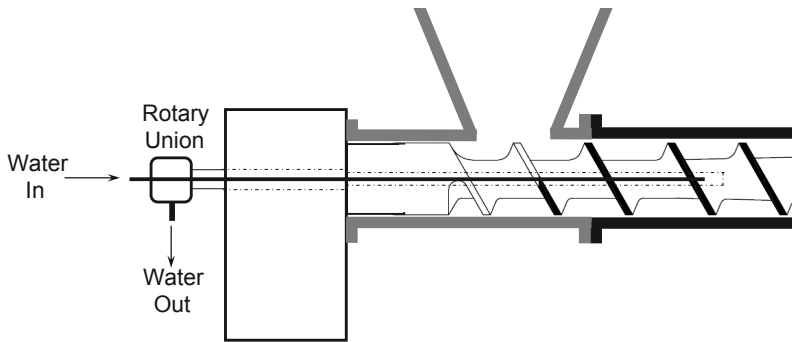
Diagram showing a rotary union piping assembly for cooling the feed section of a screw
